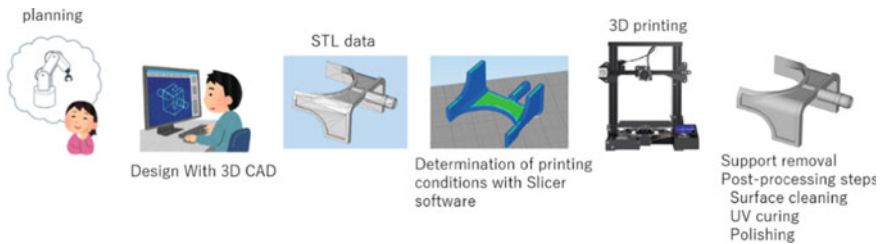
Steps involved in robot part fabrication using a 3D printer
